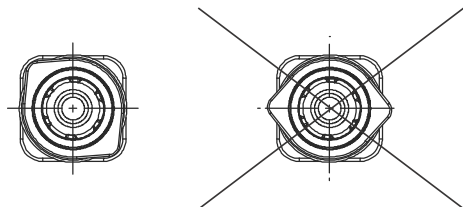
Fitting the stationary shaft seal part (only SiC/SiC)
